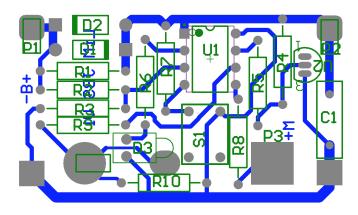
Single-sided PCB layout for the circuit. Note that pads are provided for meters with 0.6-inch and 1.0-inch spacing of the terminal posts. Bottom-side copper is in dark blue, screen-print overlay in green, pads in grey.
